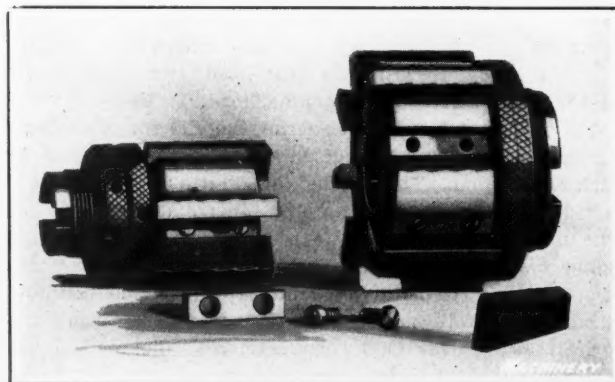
Reamer having a Double Adjustment, made by the Cleveland Cutter & Reamer Co.
